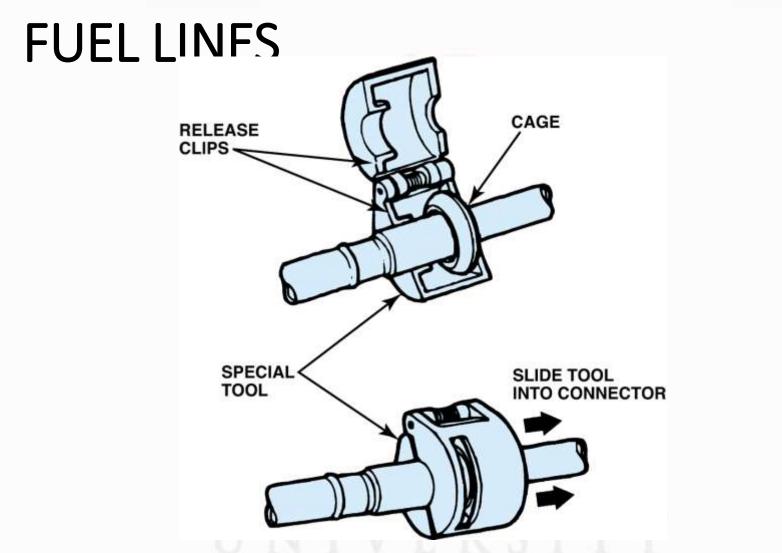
Ford spring-lock connectors require a special tool for disassembly.
